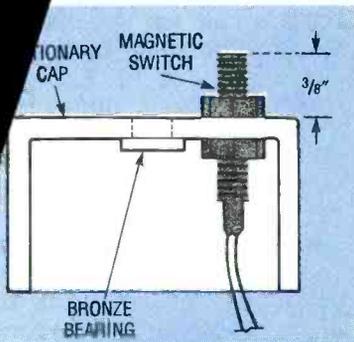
THE BEARING AND MAGNETIC switch install in the stationary cap as shown here.
